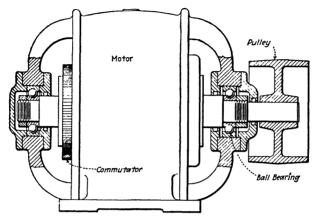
An accepted practice in the mounting of ball bearings in motors.
